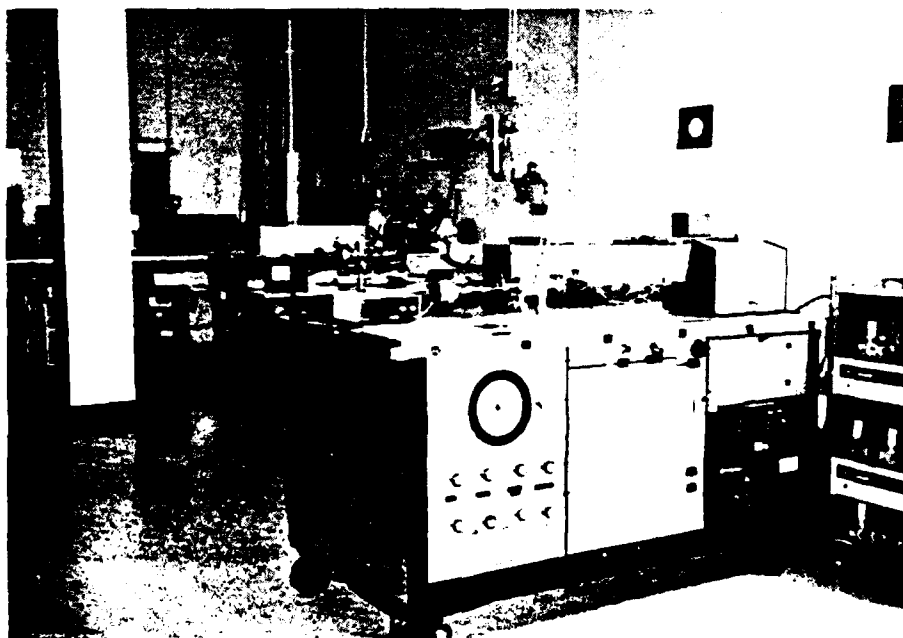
Inert Gas and Low Pressure Welding Station
